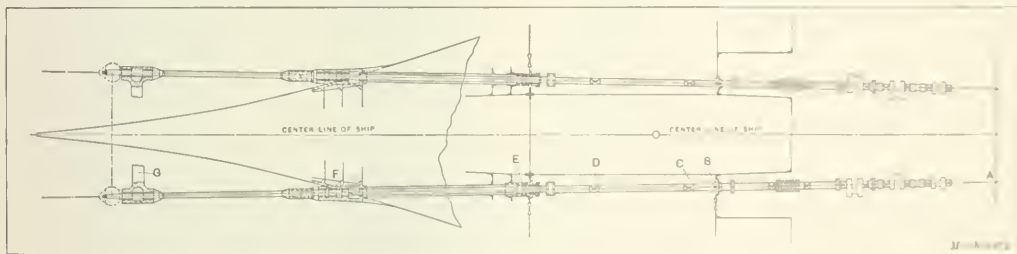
Plan View of Propelling Shafting of Twin Screw Ship, showing Cranks, Thrust Bearings and Propeller Shafts
